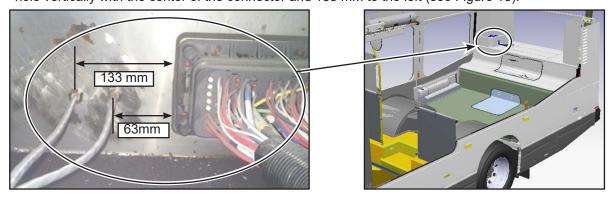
Drill Two Holes for Later Installation of Cable Glands
